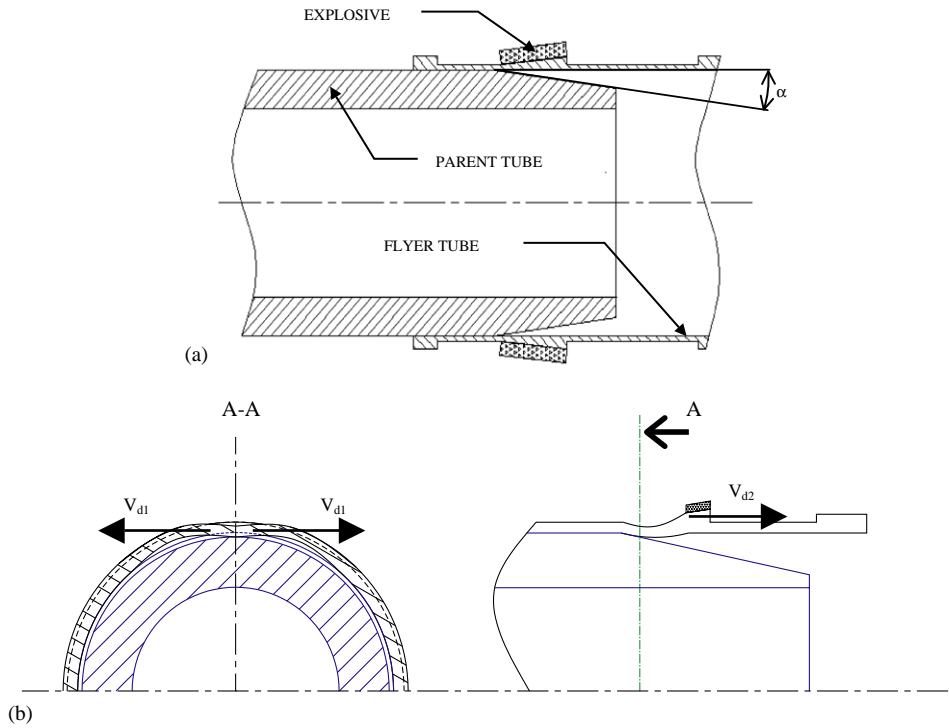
(a) Configuration used in explosive welding of capsule; (b) detonation velocity V_{d2} enables welding in longitudinal direction whereas V_{d1} is too high to enable welding in the radial direction.
